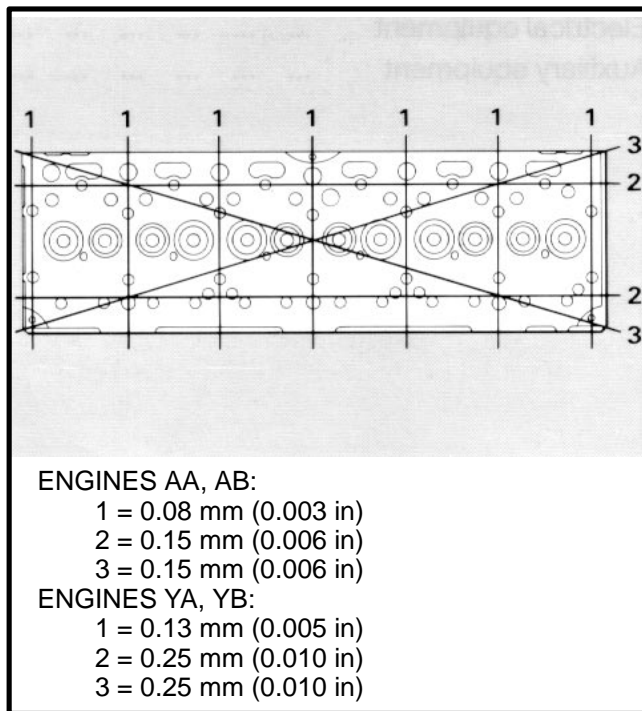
CHECK THE CYLINDER HEAD FOR DISTORTION
